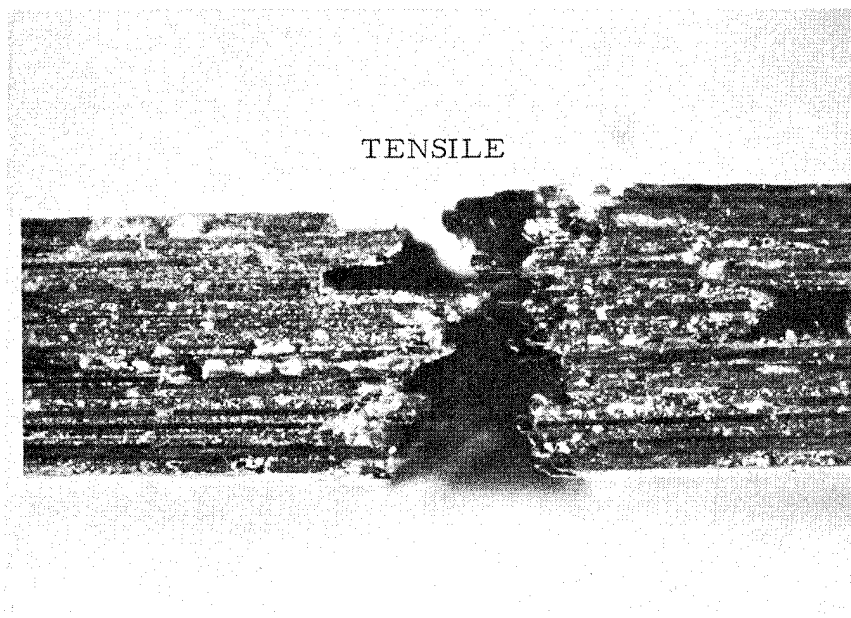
18X EDGE-VIEW OF IMPACT FRACTURE AREA OF PANEL #4 BORON
